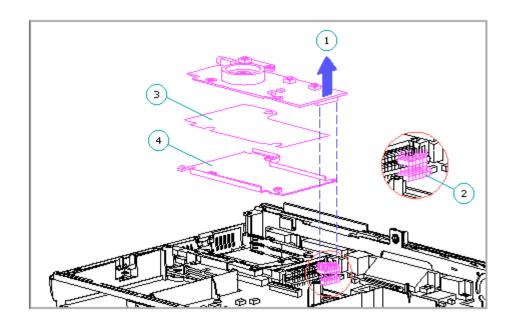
Removing the Power Interface Board, Insulator, and Shield
